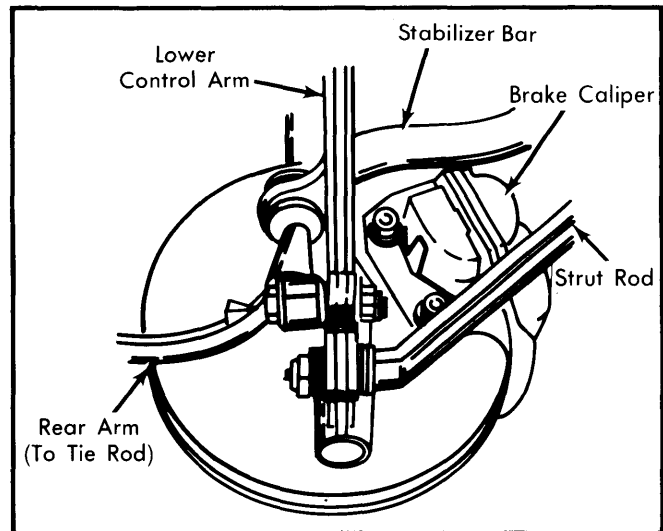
Components That Must Be Disconnected Prior to Strut Assembly Removal
